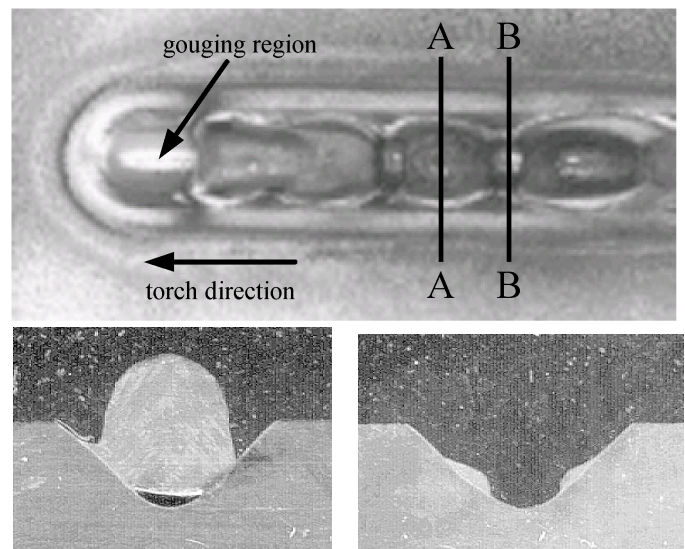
Humping in GTAW. The top figure is a top view of the humped weld seam, the bottom left picture is a cross section of the bead-like protuberance (cross section A-A), and the bottom right is a cross section of the void between beads (cross section B-B).
